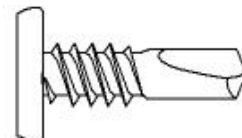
PPH PANCAKE FRAMER HEAD SCREW
